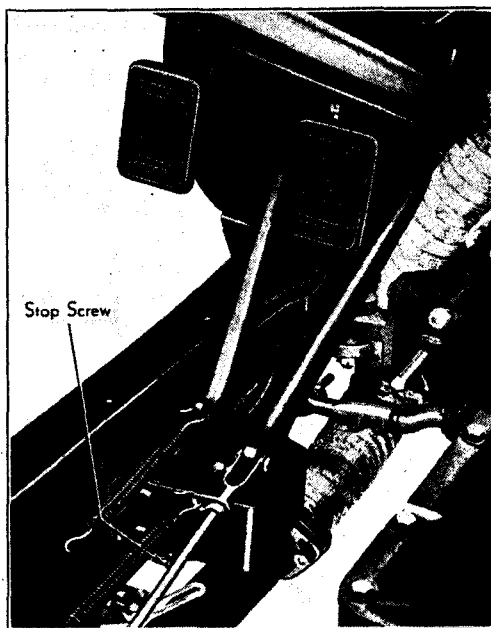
The Series 10 and 20 pedal assembly showing the clutch pedal stop screw
